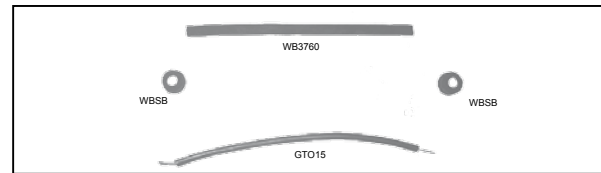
Cut 7" of WB3760 Sleeving and cut 8 1/2" of GTO15 cable
